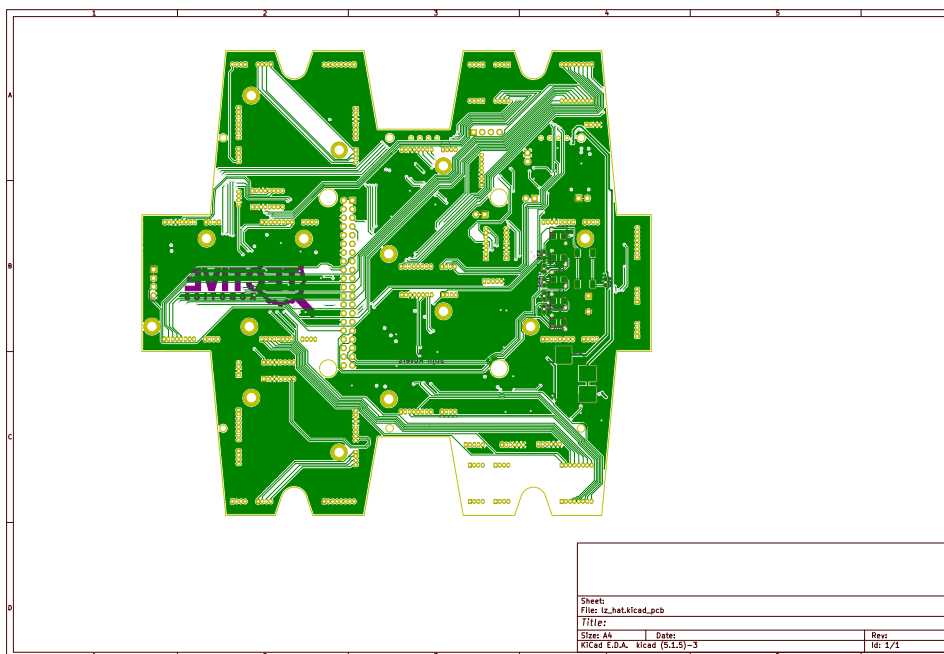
KiCAD PCB Design Bottom-Layer Layout
